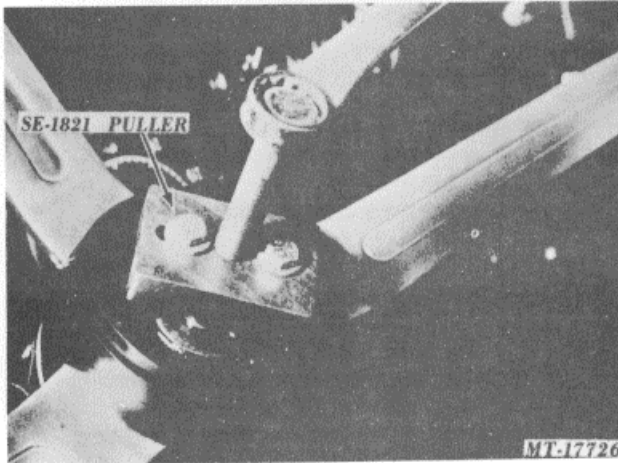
Steering Wheel Removal Using Puller SE-1821
